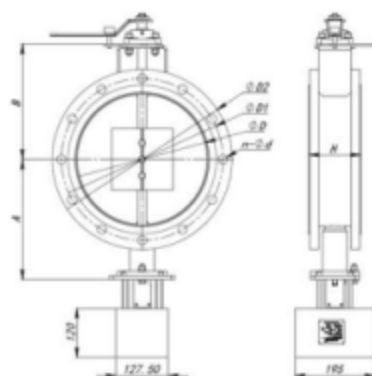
Dimensional schematic diagram of AKRZ+ Actuator
